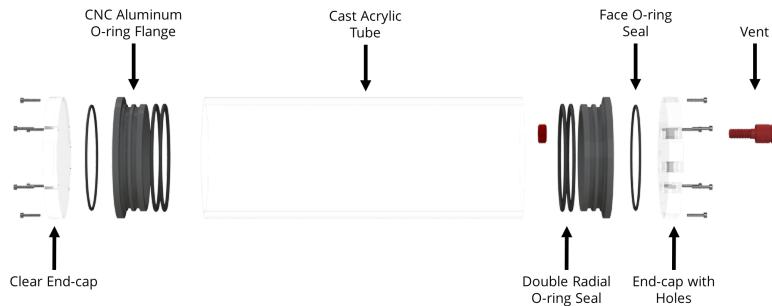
Exploded view of pressure housing parts. Note that the end with the vent cap also has the pressure and temperature sensors attached
